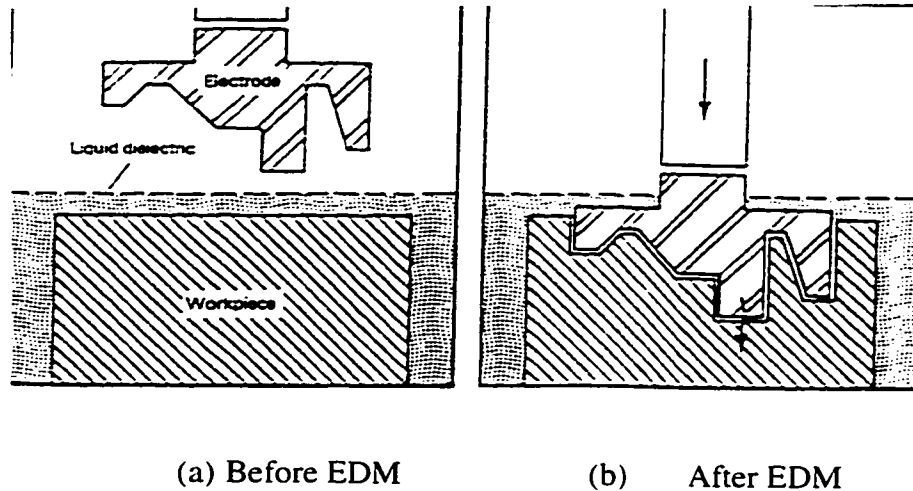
Schematic of Electrical Discharge Machining<sup>146</sup>
